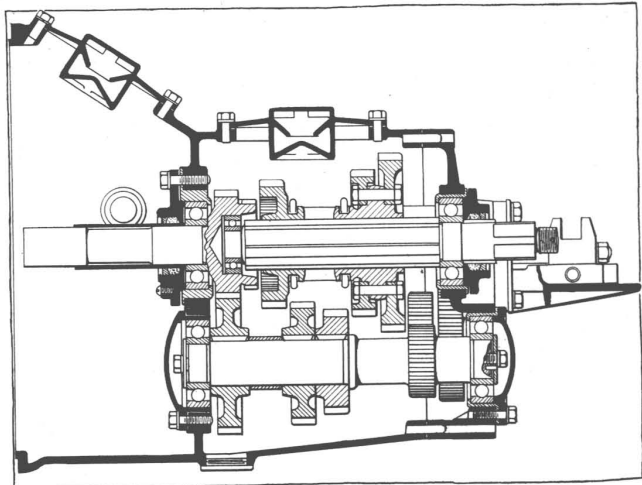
A side sectional view of the Chalmers 36 gearset, showing short, stout shafts on ball bearings and compact construction throughout
